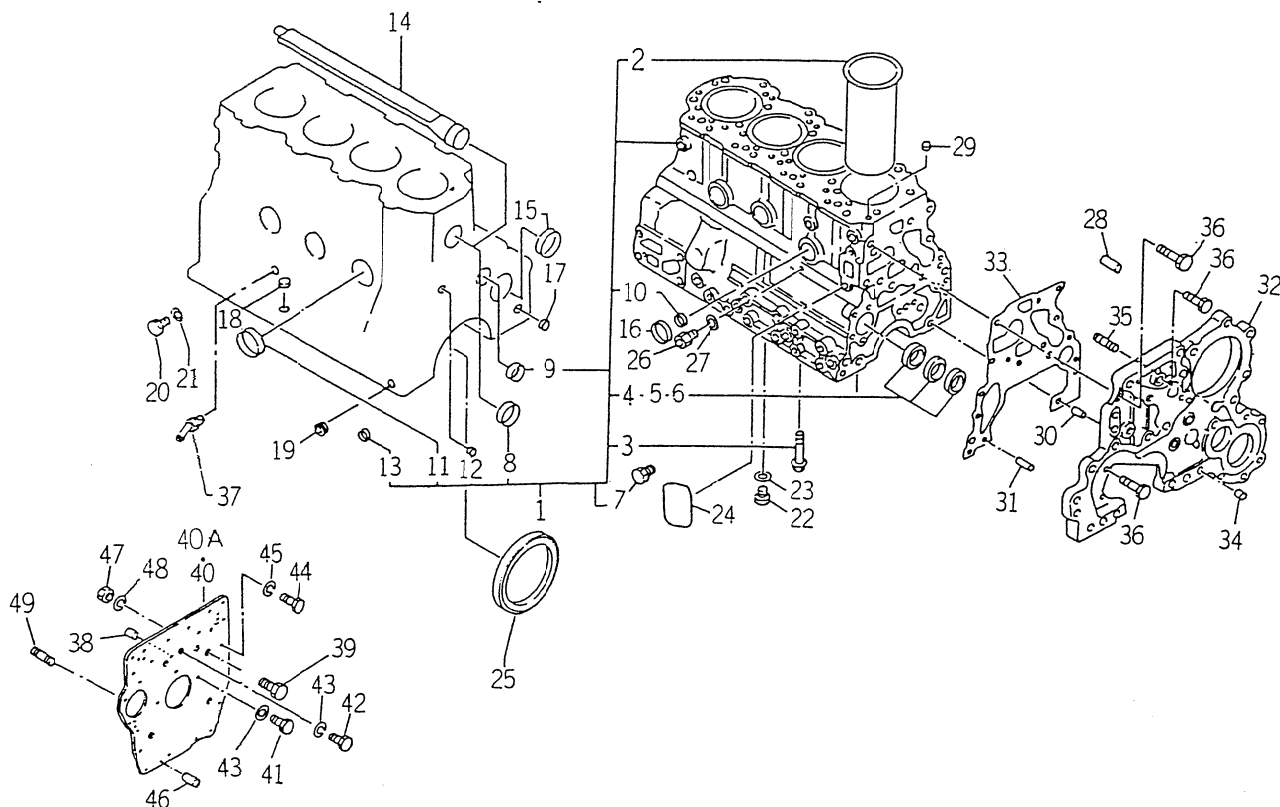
CYLINDER BLOCK AND OTHER PARTS
